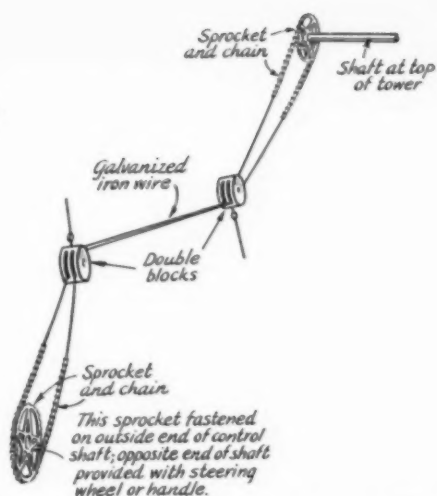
GALVANIZED WIRE AND BICYCLE CHAIN ARE USED IN THE STEERING SYSTEM
